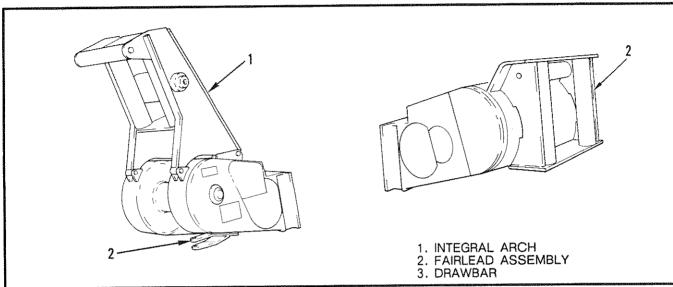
W3.5B TOWING WINCH, OPTIONAL EQUIPMENT
